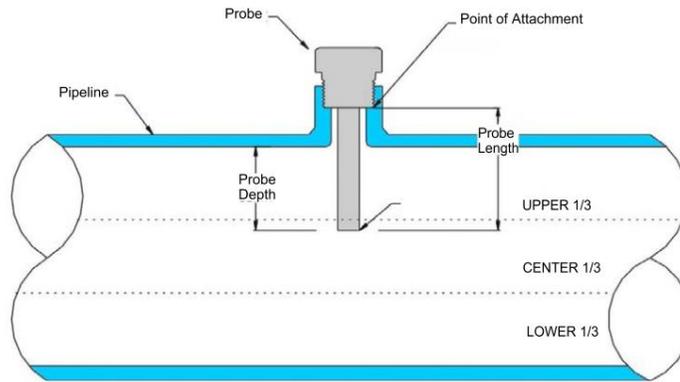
Probe Dimensions Used to Determine Maximum Recommended Probe Length
